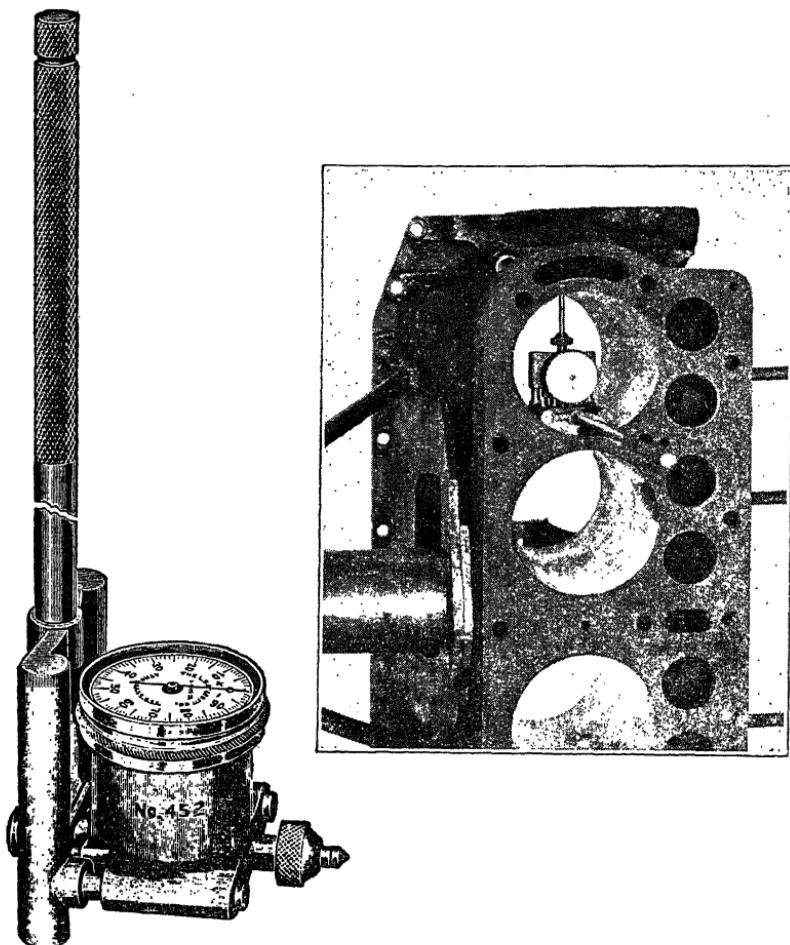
Using a Cylinder Gauge to Test Cylinder Condition—Starrett Gauge at Left
